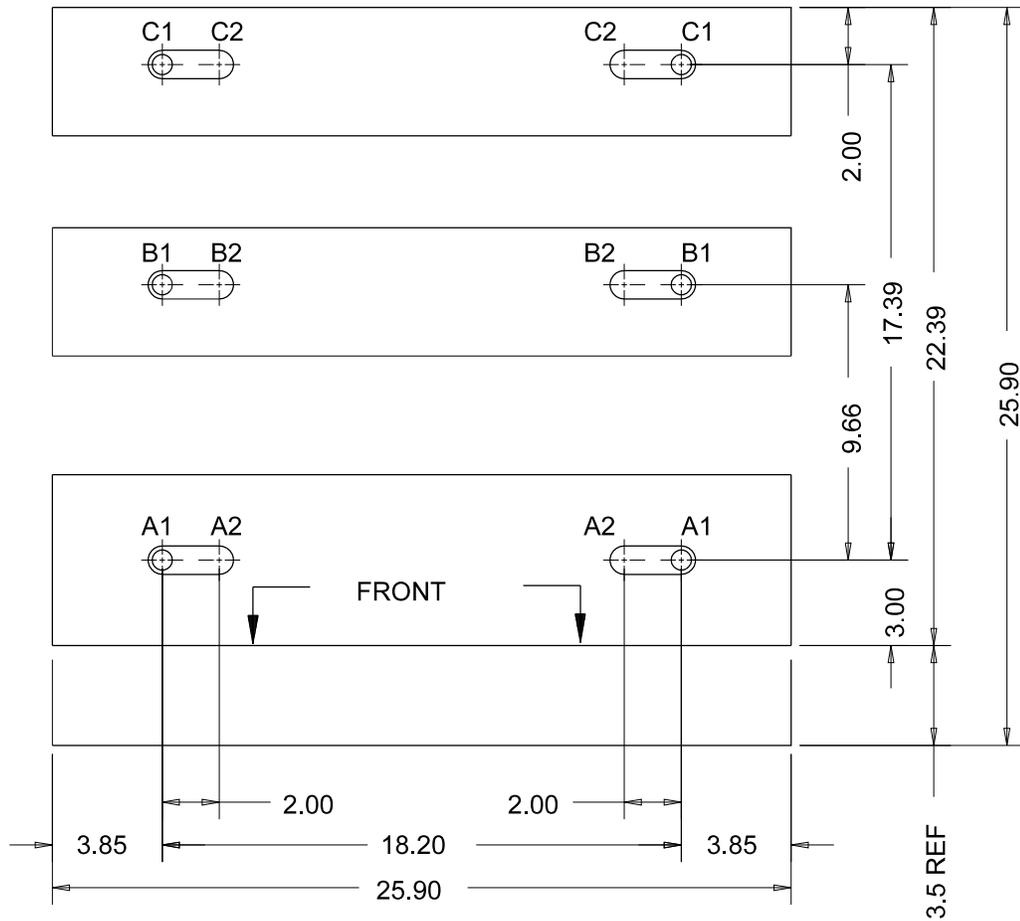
Floor Mounting Hole Pattern for Group 10 Battery Stand
